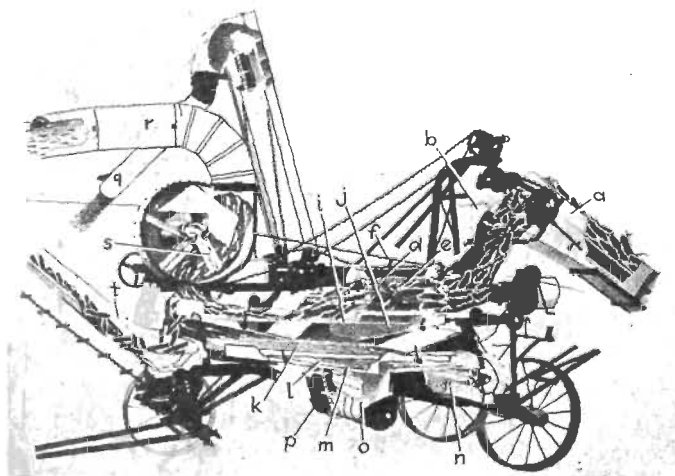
Sectional view of cylinder corn sheller, showing action of the various parts.
